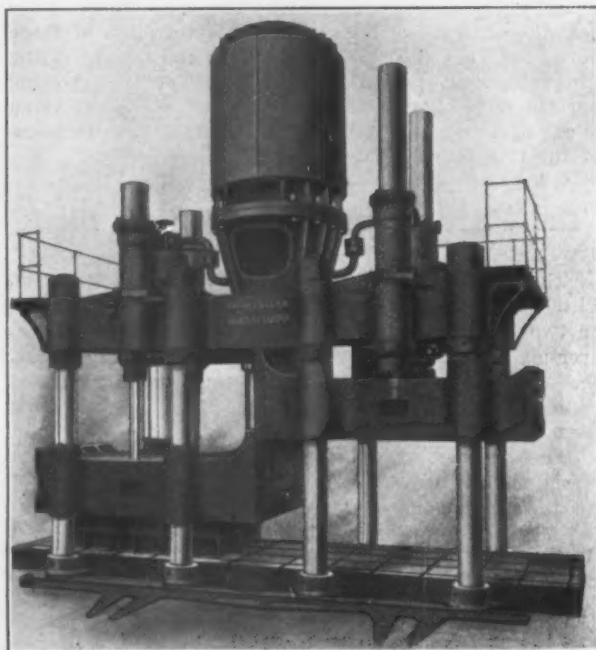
The Steam-Hydraulic Bending Press with Two Crossheads.
